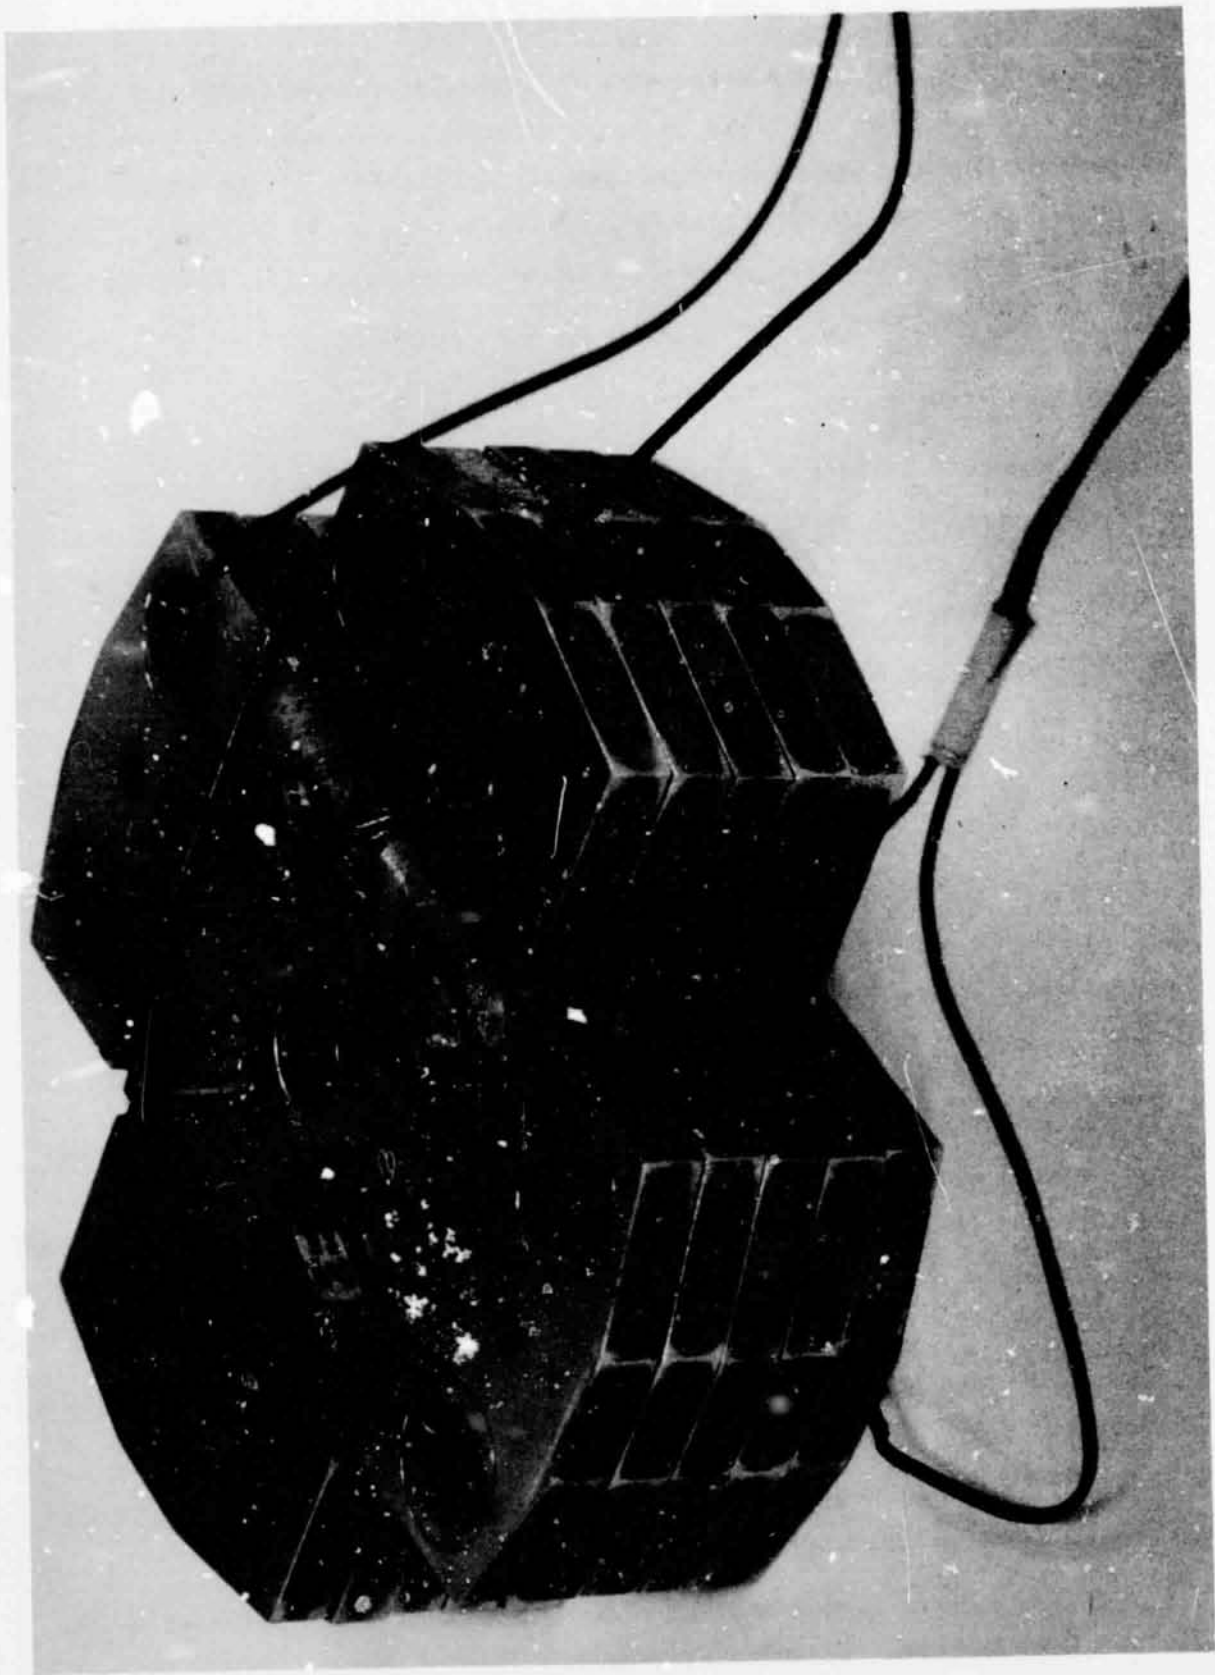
Test Assembly of Twenty Elastomer Shear Specimens, Each 0.5 cm (0.2 in.) High
